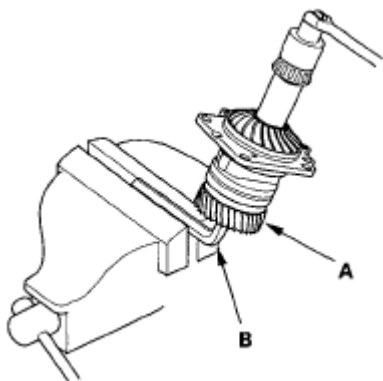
Holding Transfer Shaft Assembly With Wrench
